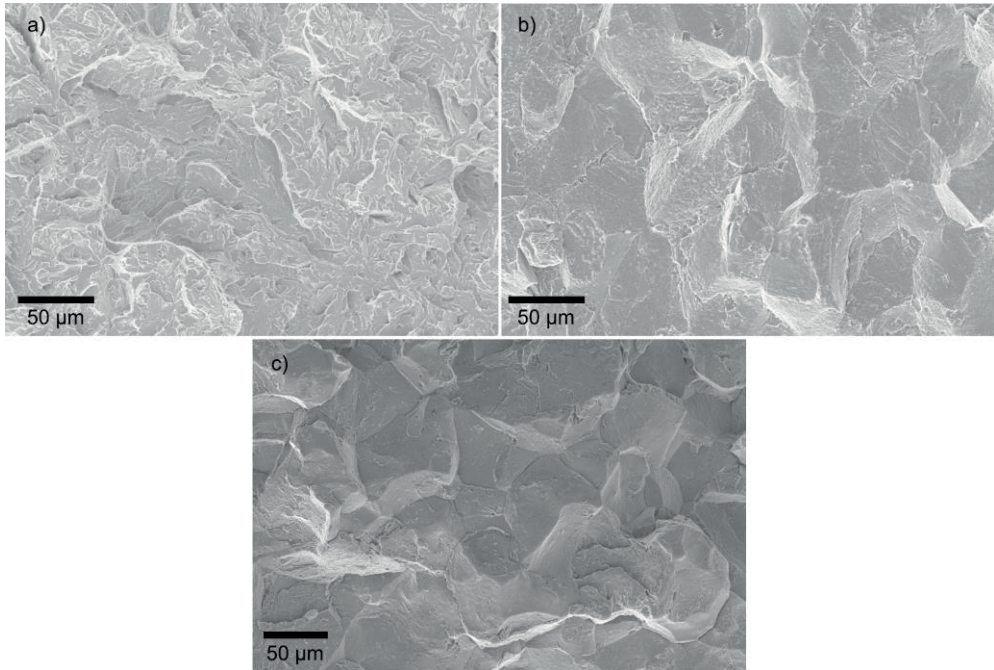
Fracture surfaces of fracture toughness test samples showing (a) transgranular fracture, (b) intergranular fracture, and (c) opened flame-cut crack surface (Publication V).
